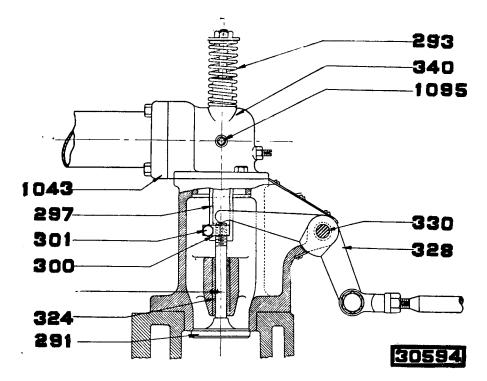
Gas Inlet Box (Showing old type valve)
